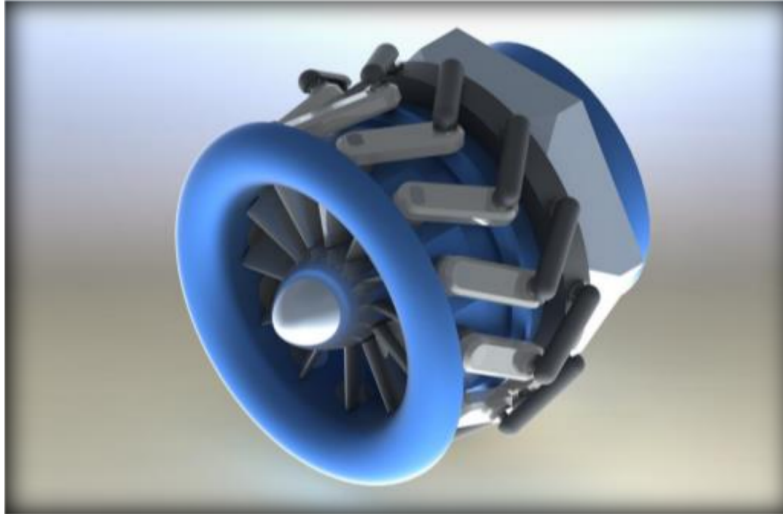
IGV assembly for a small turbine engine. Extracted from [20]
